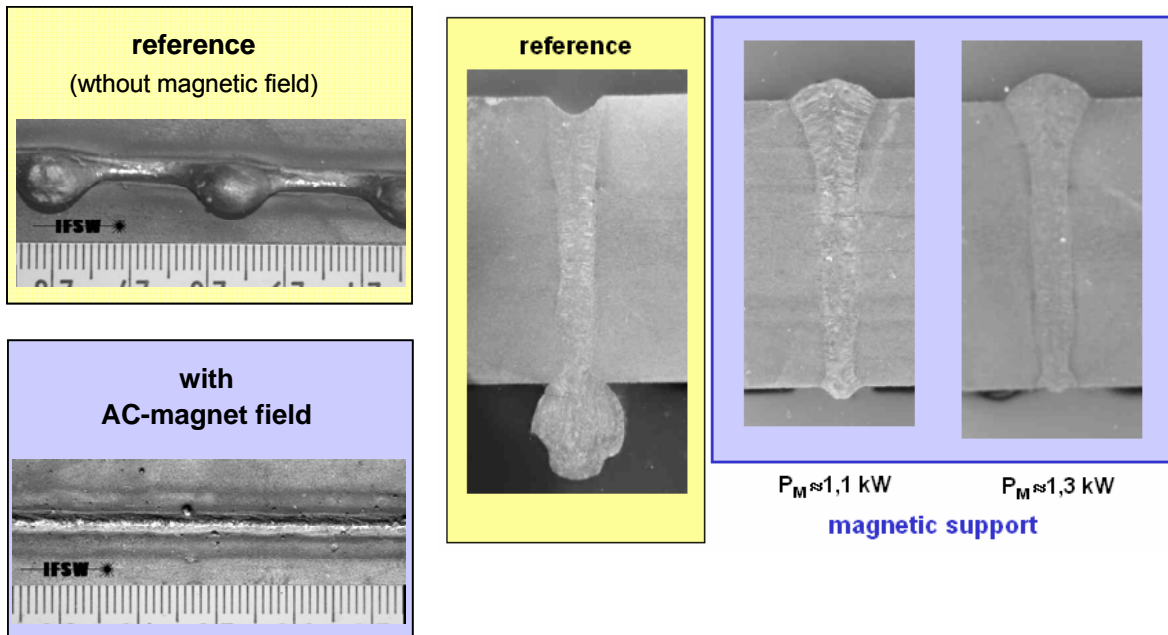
Left: Photos of the rear side of the welds obtained without and with the EM weld-pool support. Right: Cross-sections of the same welds. The net AC magnet supply power of about 1.3 kW is enough for full compensation of the hydrostatic pressure in the weld pool (for parameters see Table 1).
